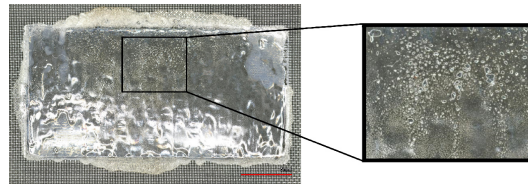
Isolated ED from specimens welded in the no clamp configuration; Vibration amplitude (peak-to-peak): 80 μm , welding pressure: 1.6 MPa (500 N), consolidation time: 600 ms, consolidation pressure: 1.6 MPa, weld control - displacement to 0.07 mm
